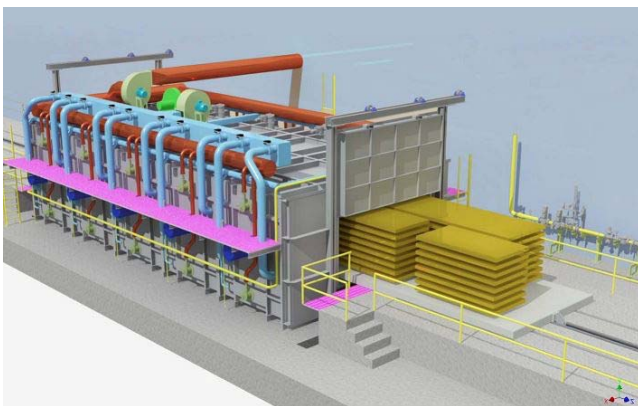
Equipment for the aging process of Aluminum alloy sheets.
